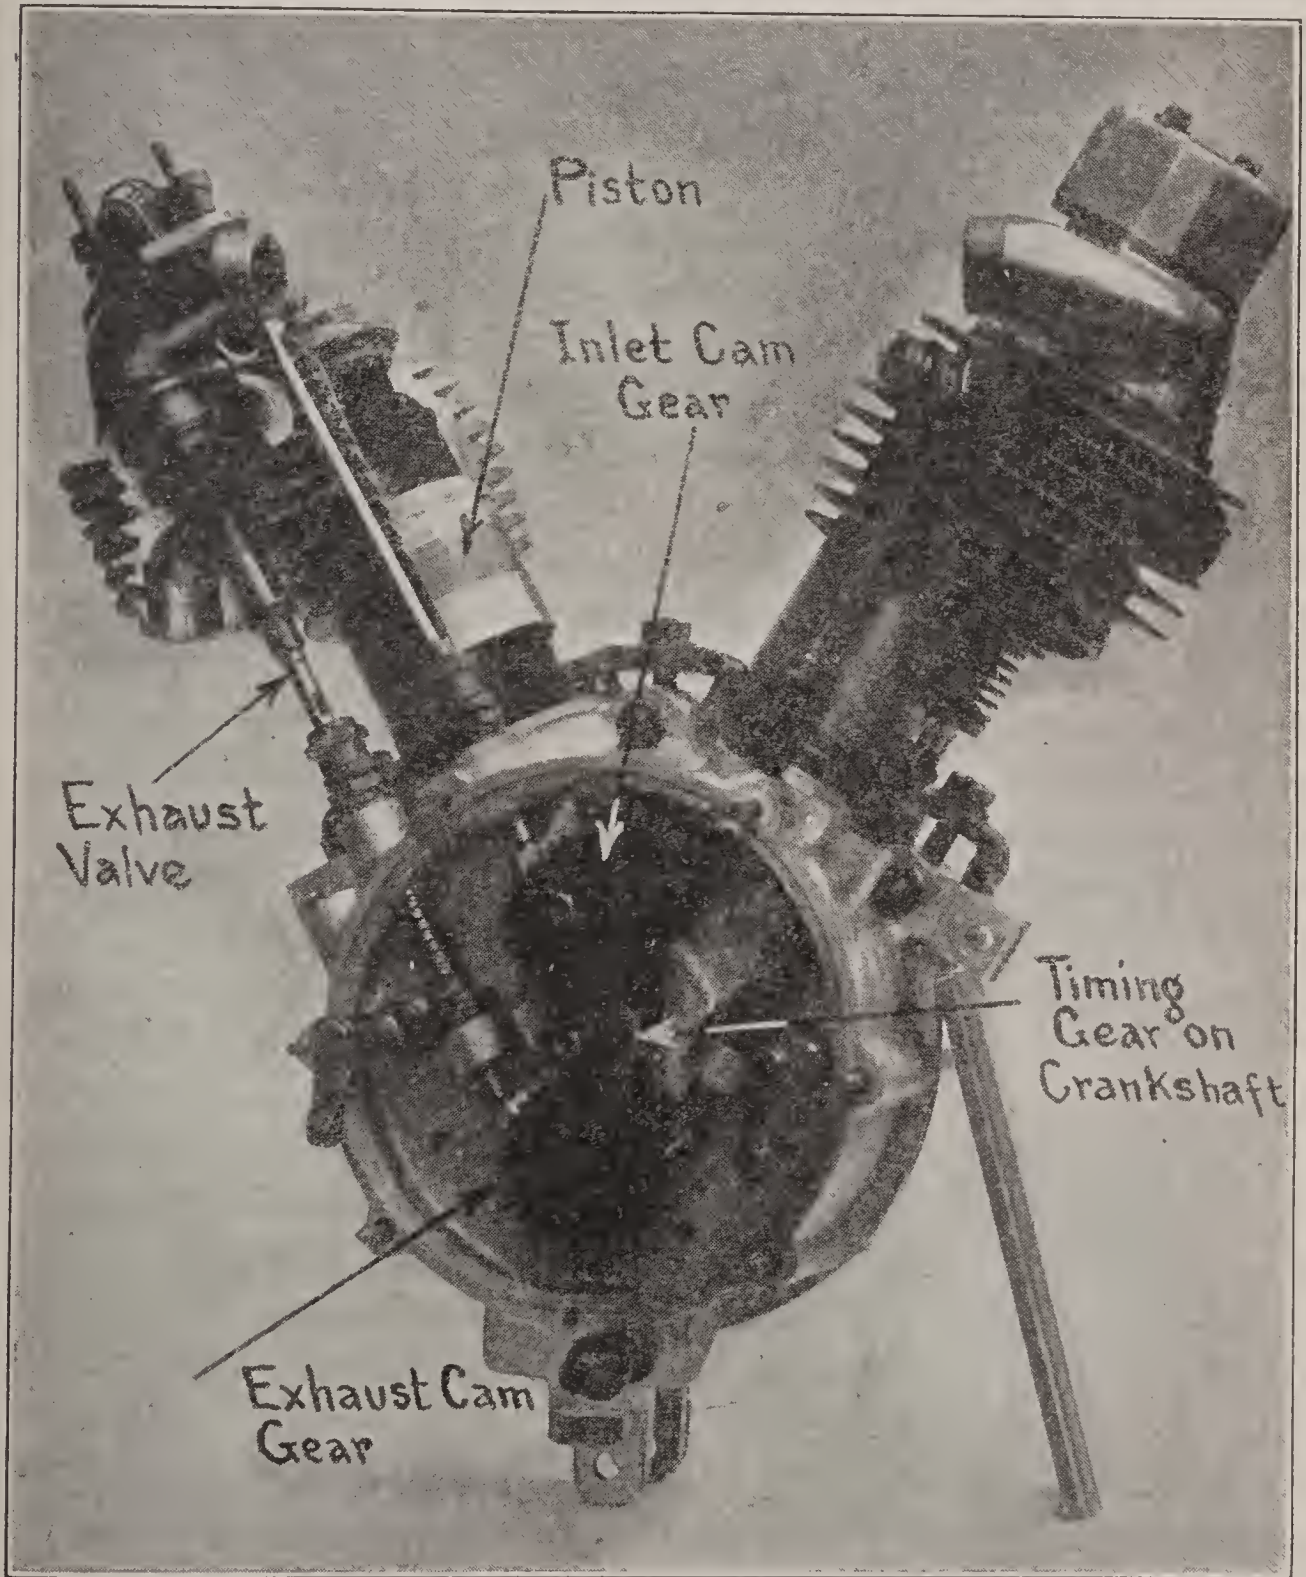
Part Sectional View of the Royal Enfield (English) Twin Motor, Showing Application of Two Separate Cam Gears, One for the Inlet Valves, the Lower One for Operating the Exhaust Members.
